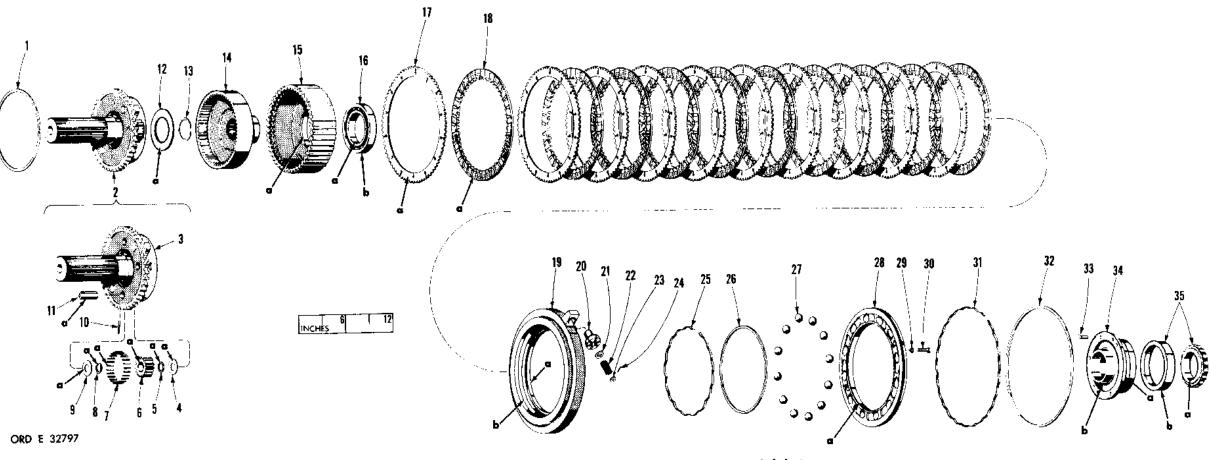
Fold-out 7 — Left-steer planetary, and brake — exploded view
